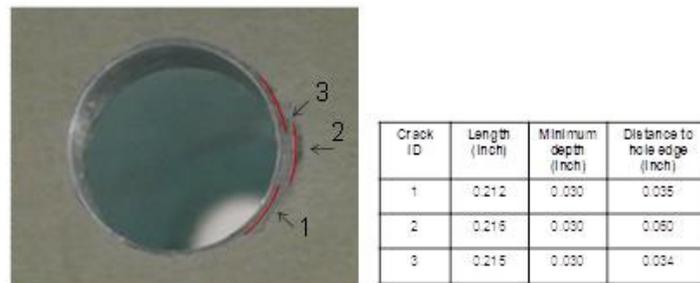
Fretting cracks on the stabilizer former sample
